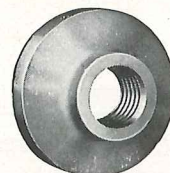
Semi-Machined Chuck Plate, threaded to fit the spindle nose of the lathe
